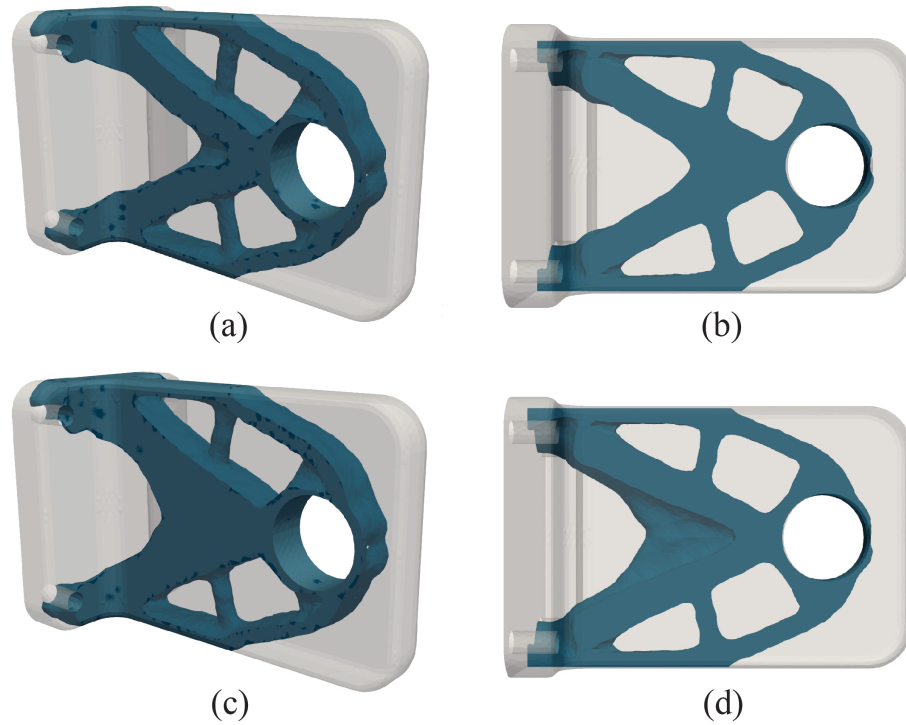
Final optimized topologies of the bolted bracket achieved by the a) MMA in an isometric view b) MMA in a side view sliced in half c) OC in an isometric view d) OC in a side view sliced in half
